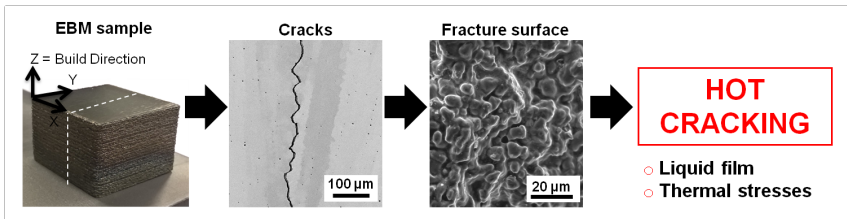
Investigation of the hot cracking mechanism affecting a non-weldable Ni-based superalloy fabricated by S-EBM.
